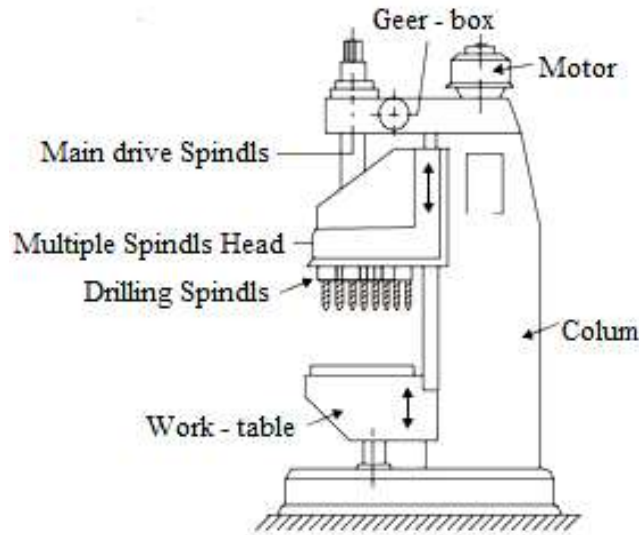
Non-adjustable multi-spindle machine of a drill press [6].
